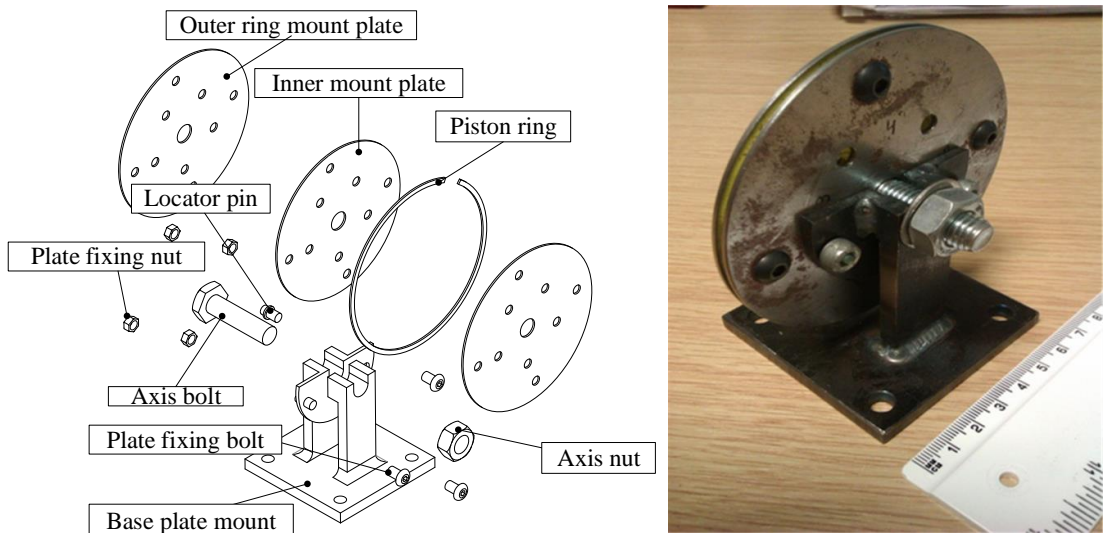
Exploded view and photograph of the Dickinson rotating ring profiler
